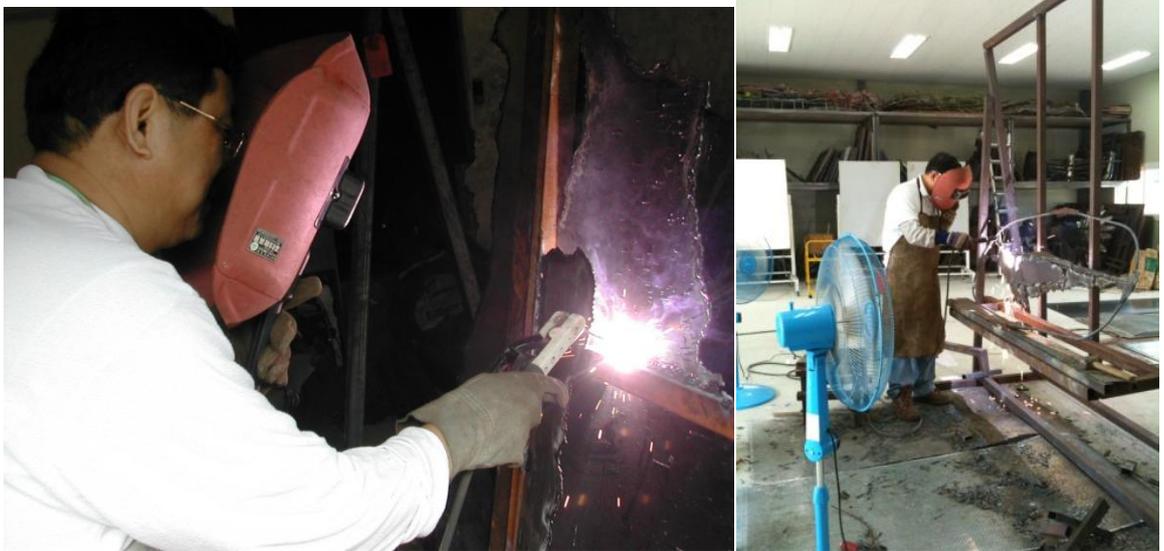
, Ki-Woong Park's working with a welding machine to transform iron structures
